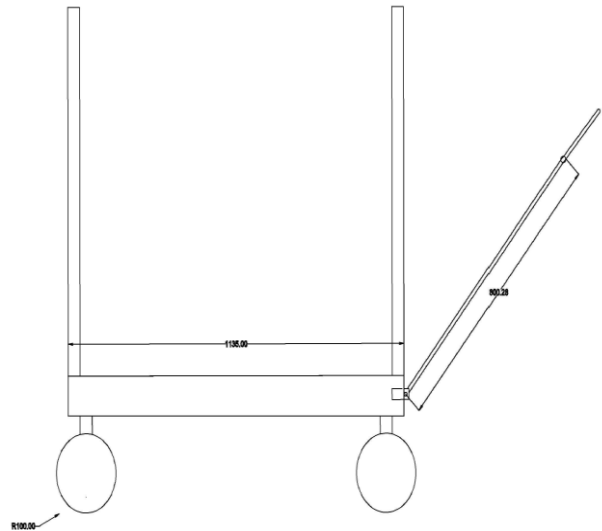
Design Of Trolley For Mast Assembly (Front View)
